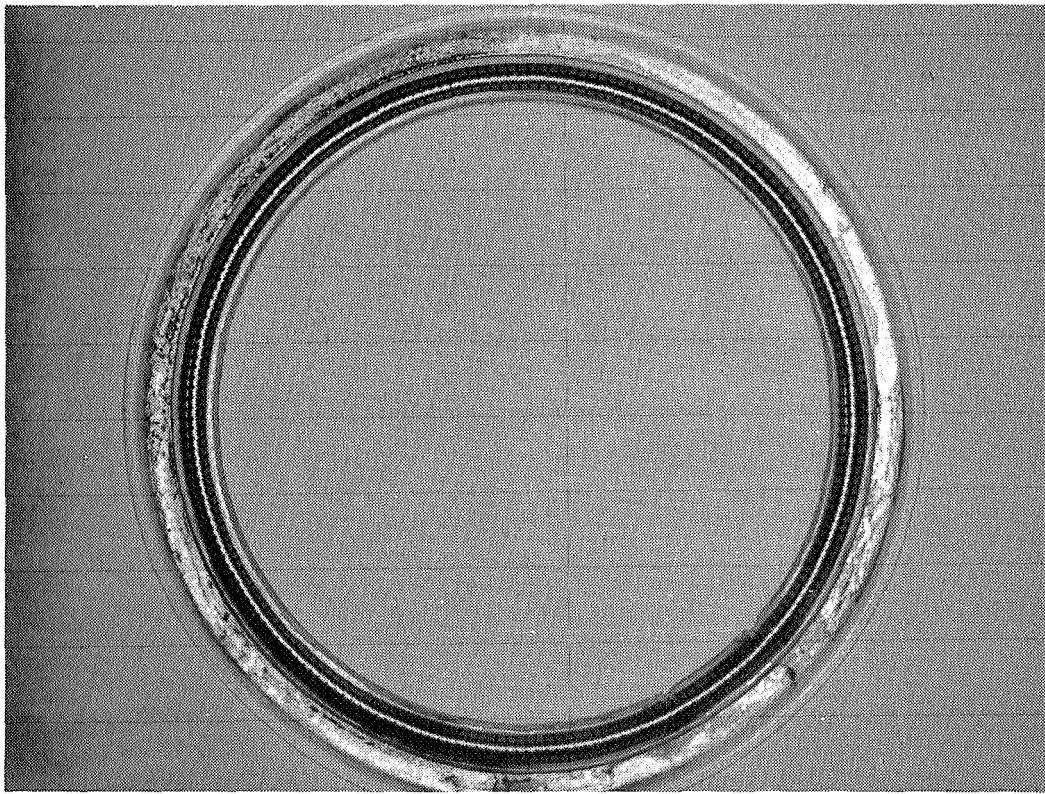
1 Valve Actuator Piston Seal (Front Side) After Task III Testing
